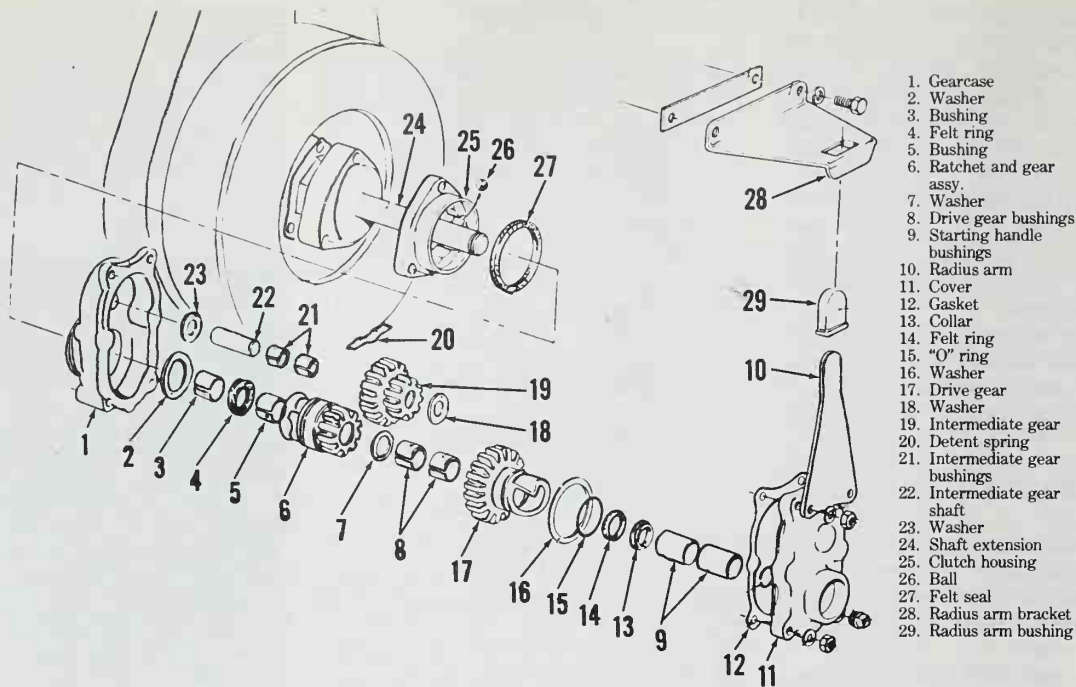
Exploded view of geared-up starter used on some LT engines.
